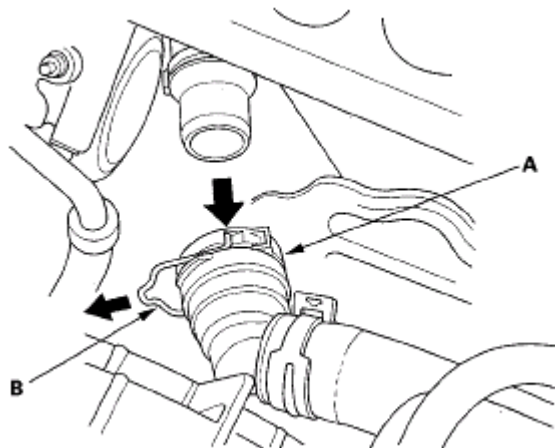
Identifying Quick Connector, Thermostat Cover, And Lower Radiator Hose
